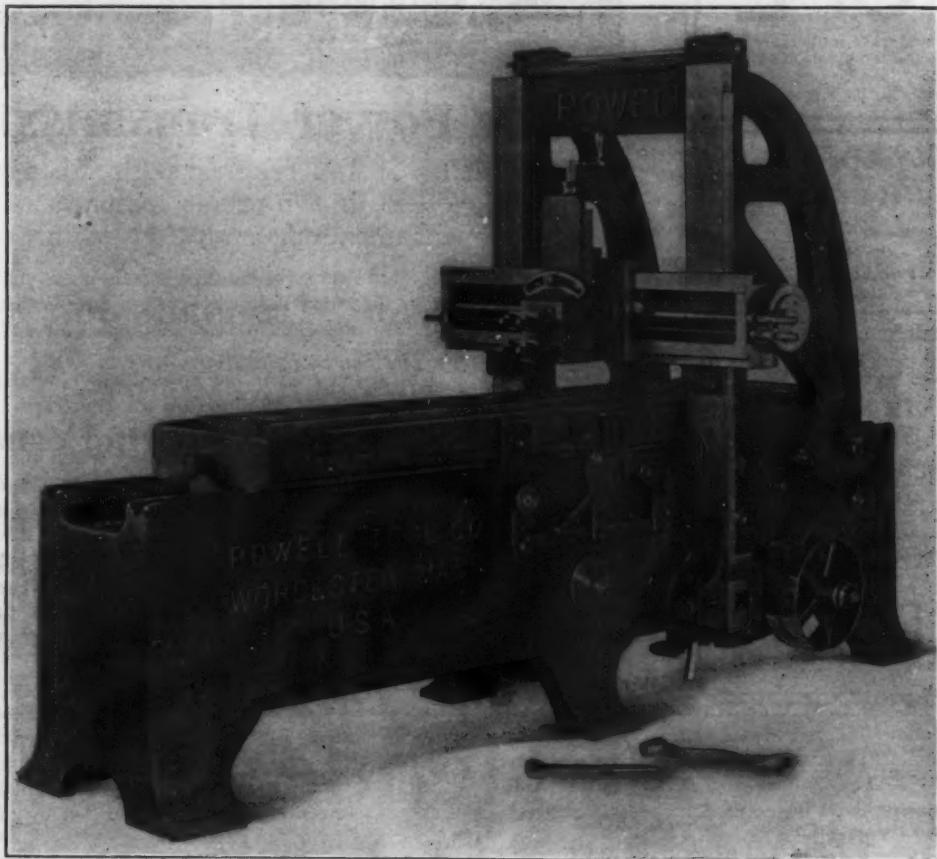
The 24-In. High Speed Forge Planer with Accelerating Cutting Speed, Built by the Powell Tool Company, Worcester, Mass.
